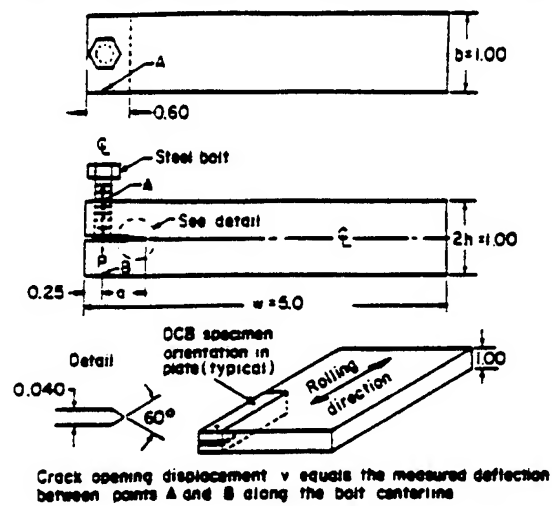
Bolt-Loaded Double Cantilever Beam (BDCB) Specimen.
